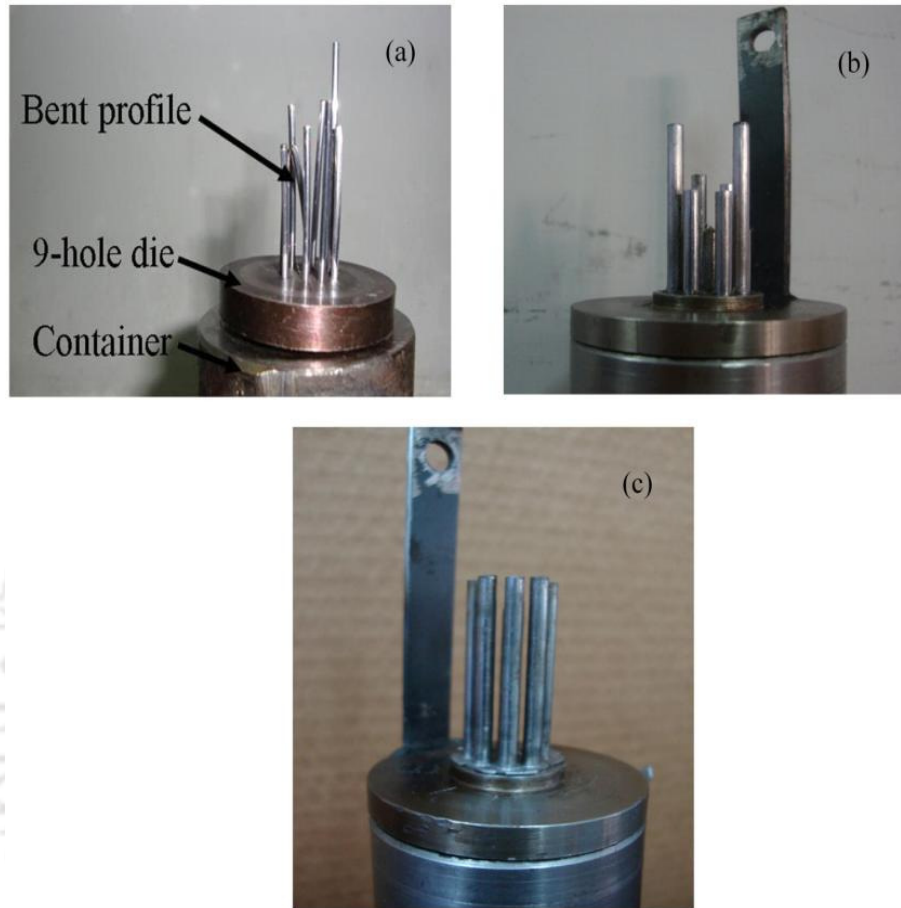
Free and constrained extrusion through 9-hole die (a) free extrusion (b) constrained extrusion at some instance (c) at the end of constrained extrusion
